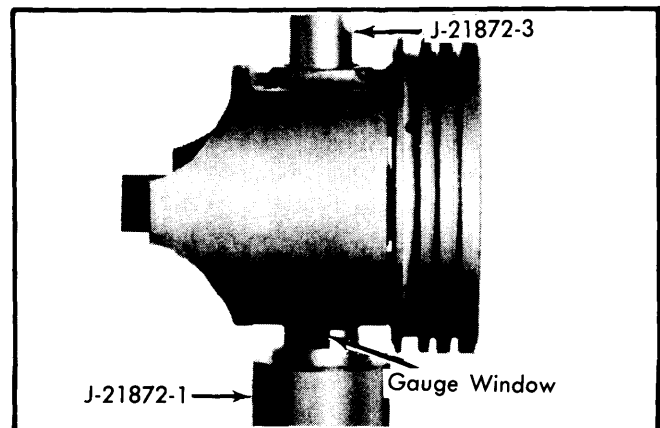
Removing Piston Pin Using an Arbor Press and Support Plate
